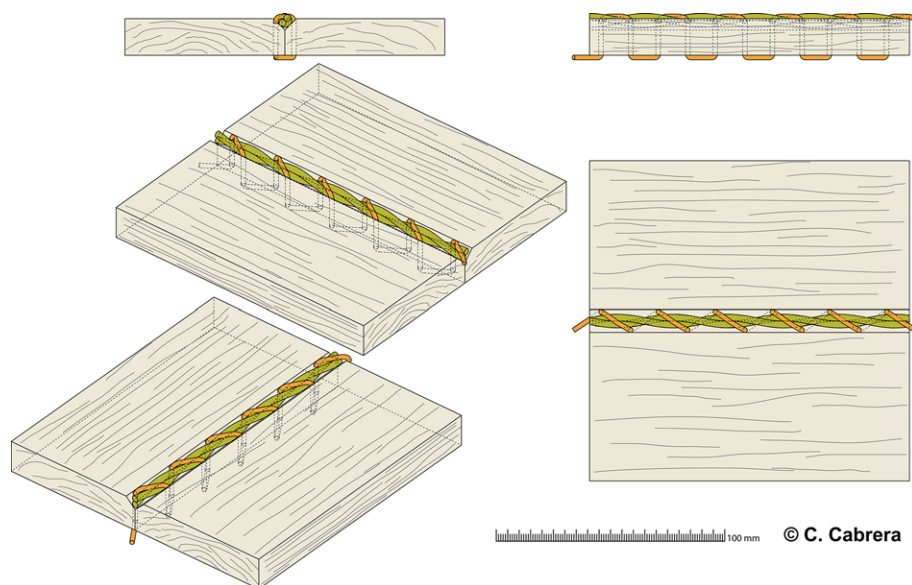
Front, side, and top views (inboard), and two isometric views of the Mazarrón 1 longitudinal continuous stitching arrangement. A waterproofing rope perceived to be formed of two strands (green) and the string that secures the rope and fastens the planks creating a pattern of short, parallel, diagonal stitches (orange)(Scale bar 100mm, ©Author).
